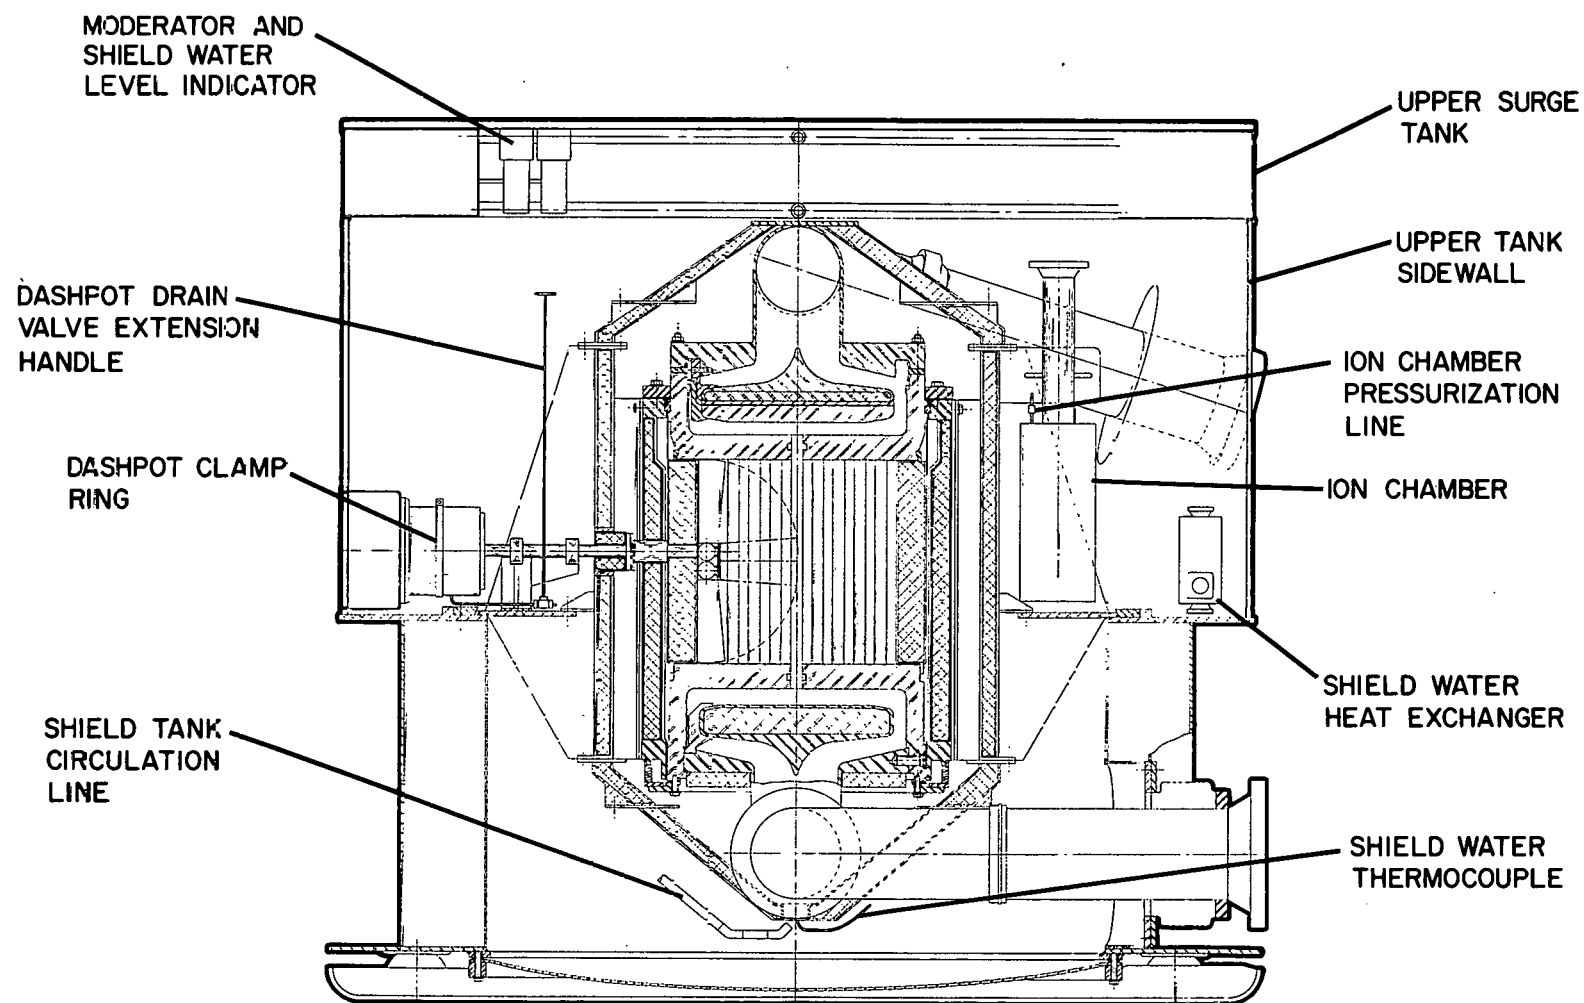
THE ML-1 REACTOR PACKAGE (SHOWING SITES FROM WHICH CORROSION SAMPLES WERE REMOVED)
